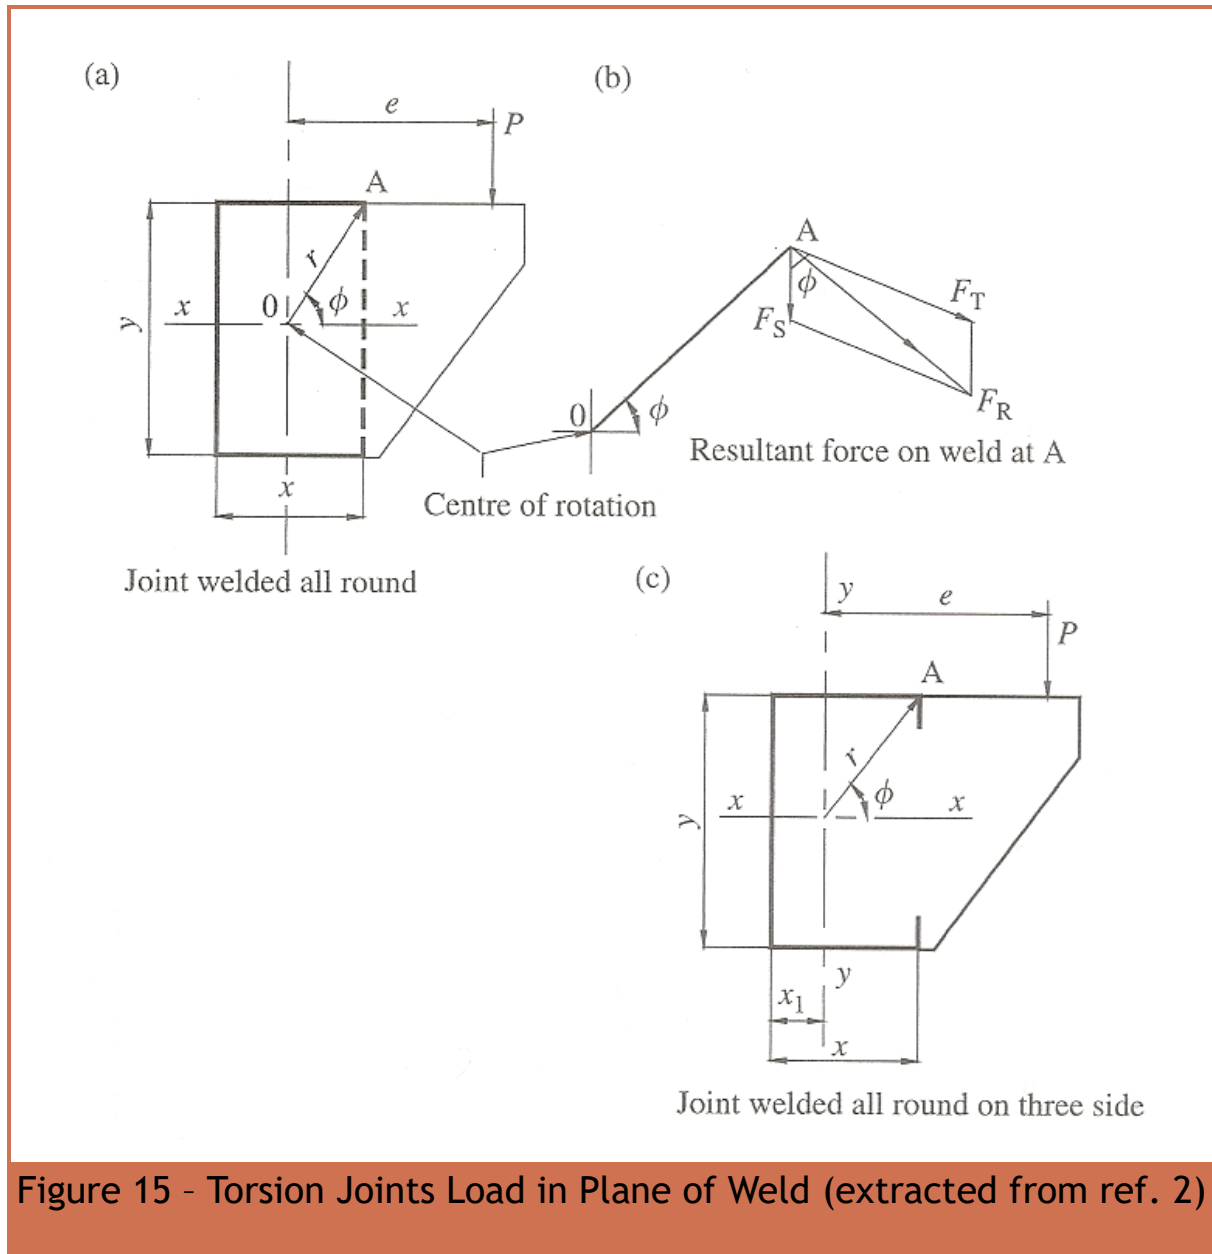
Torsion Joints Load in Plane of Weld (extracted from ref. 2)
